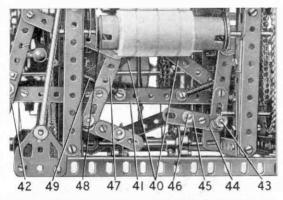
A close-up view of the cam mechanism that operates the picking sticks.
